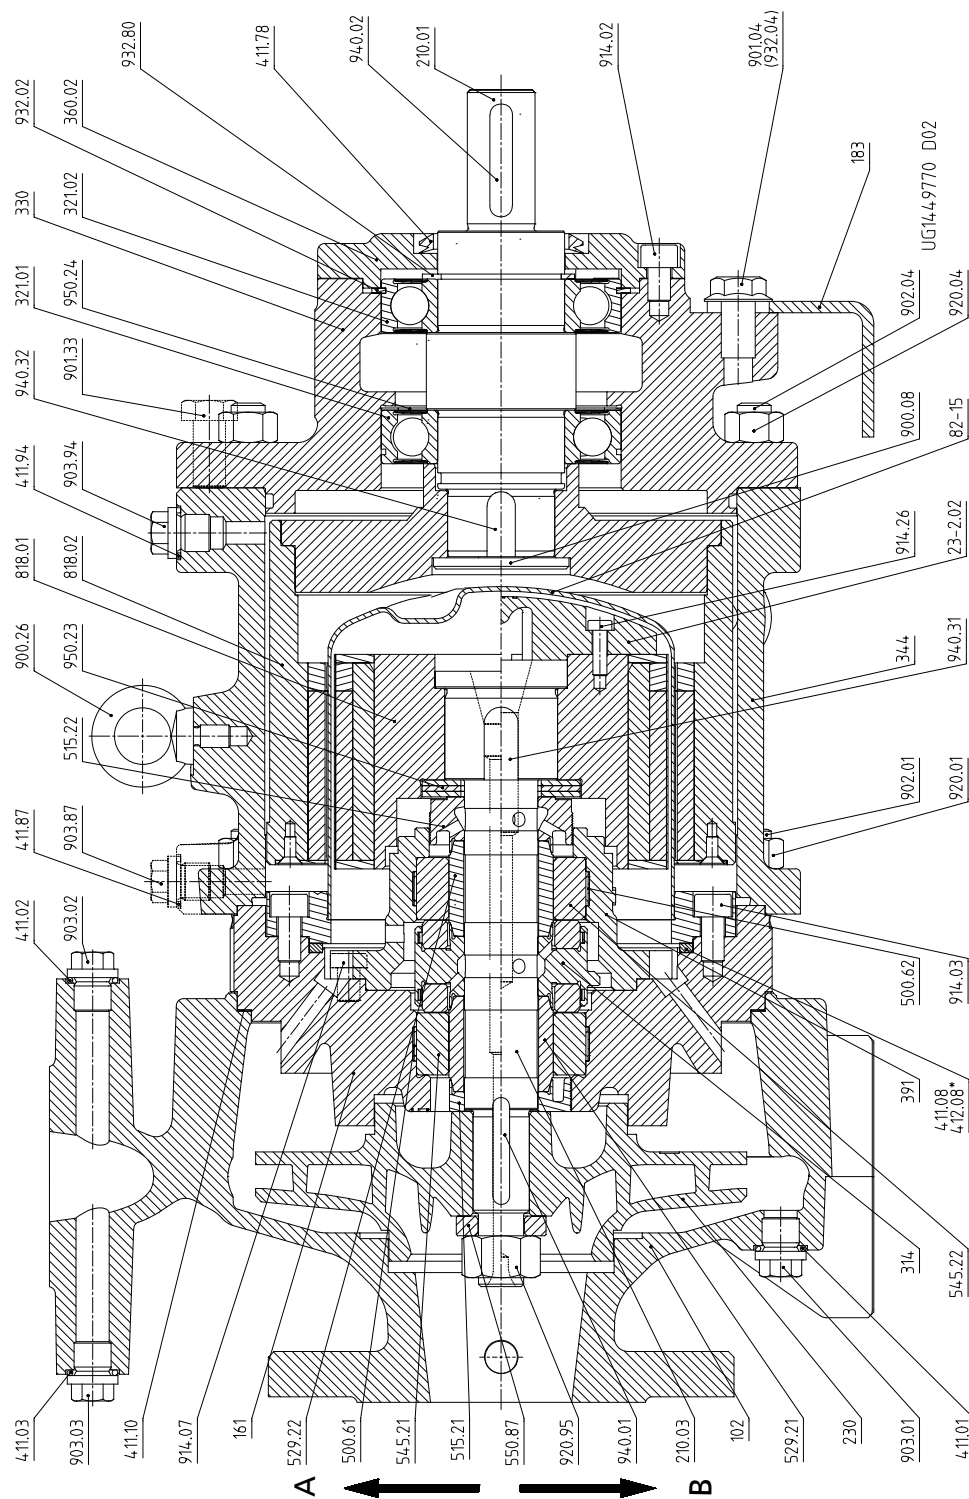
General assembly drawing of version with clamped cover, without intermediate piece
